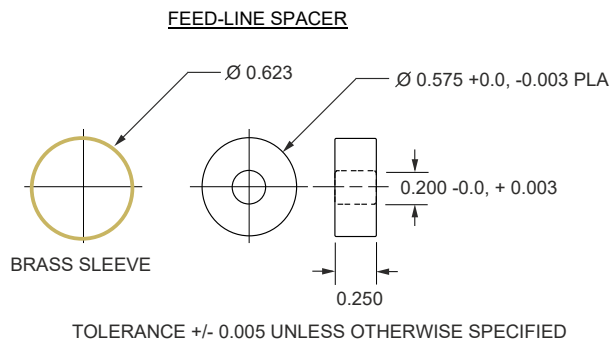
Decoupling sleeve spacers to center feed-point coax inside the sleeve.
